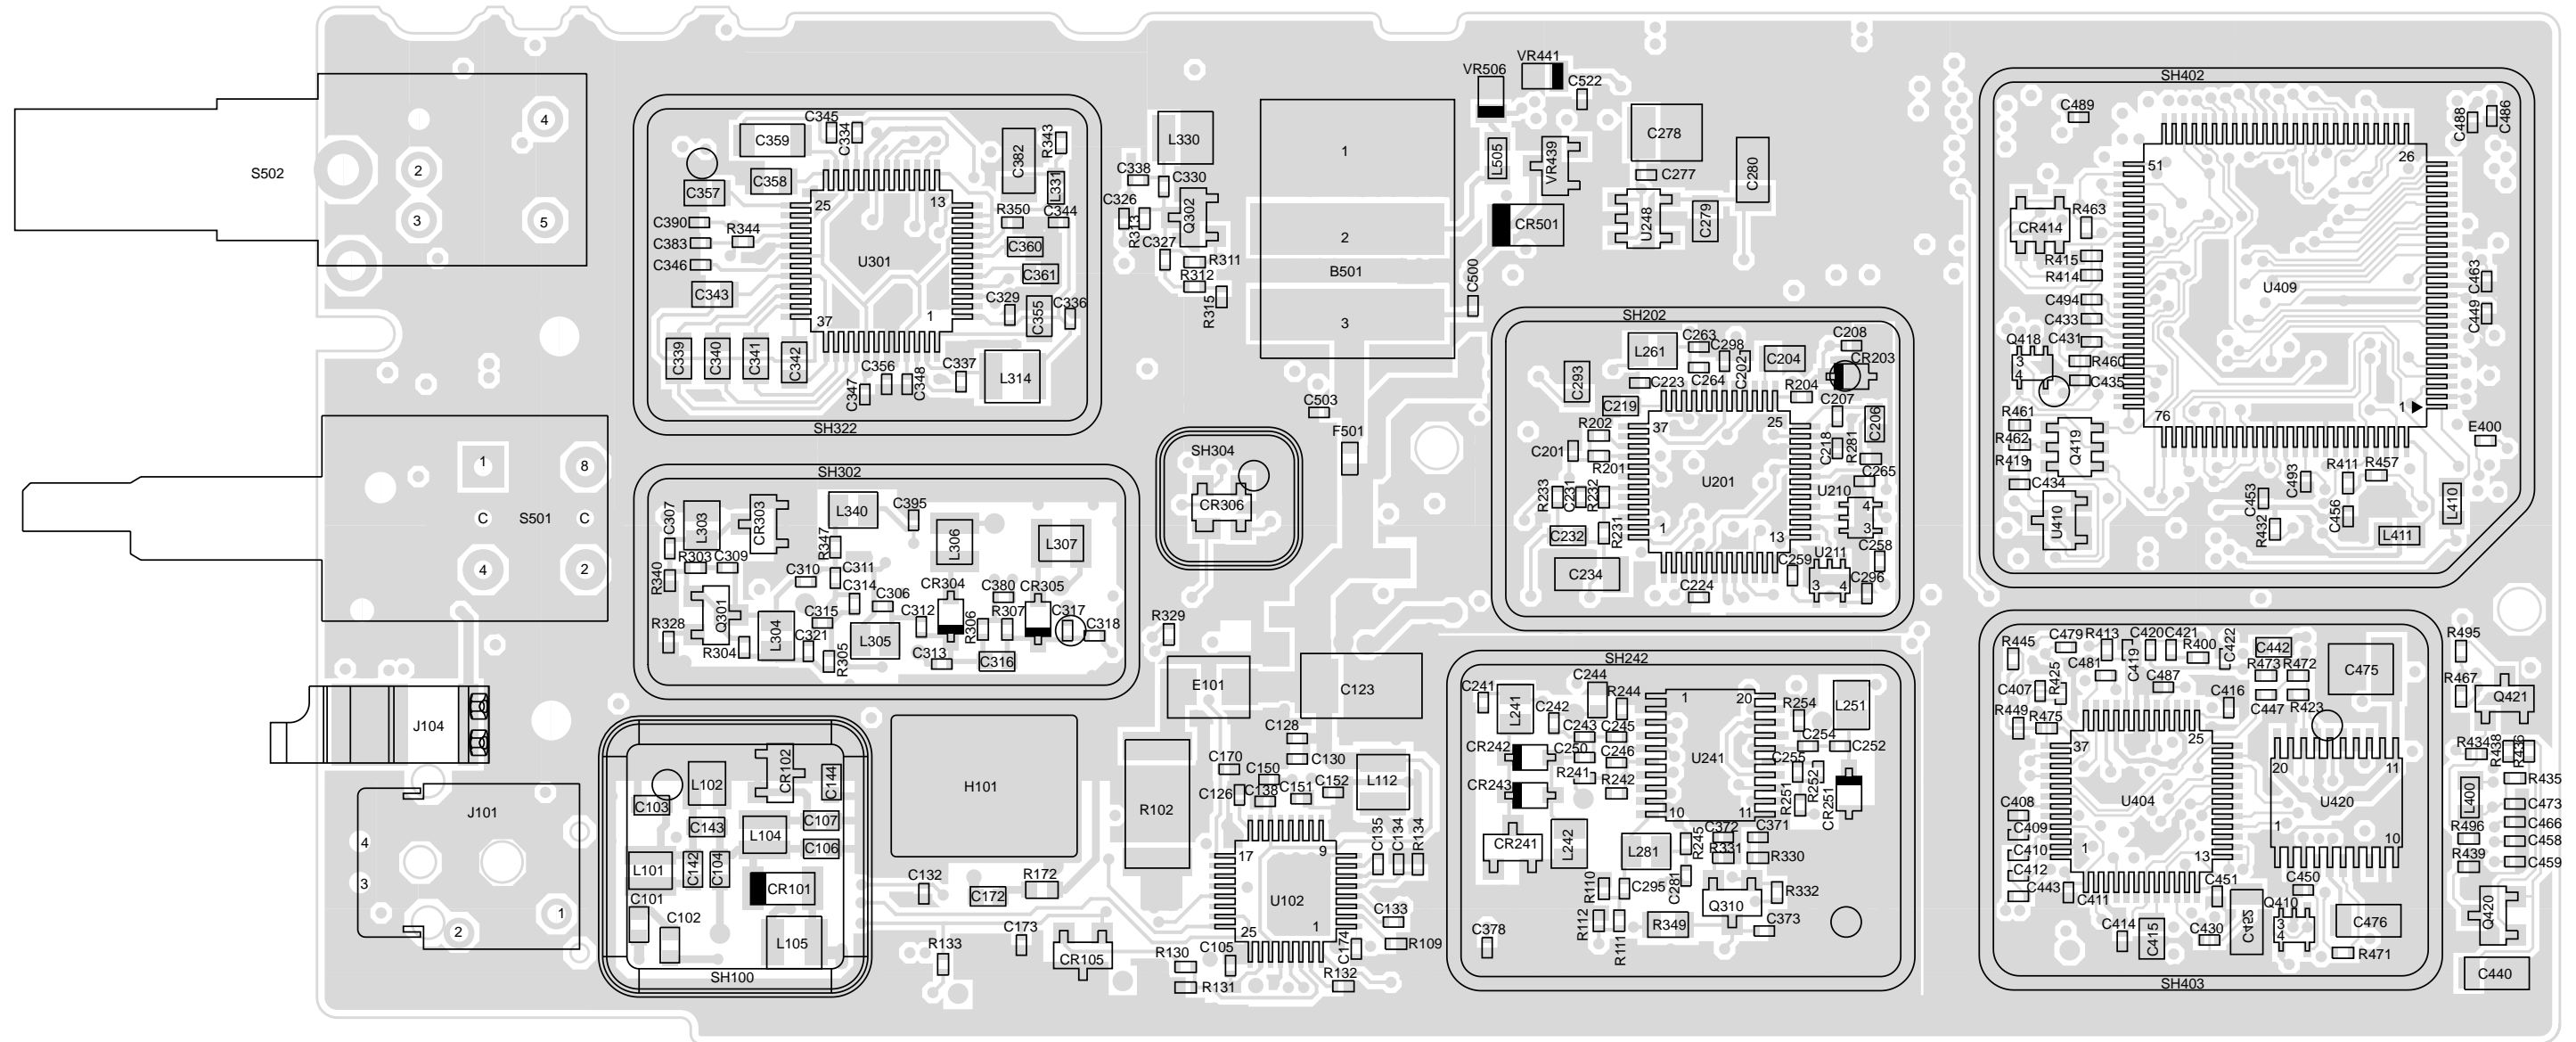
UHF (403-470MHz) Main Board Bottom Side PCB
